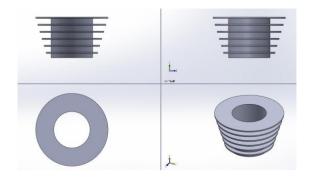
Final sketch of Circular Cylinder Fin
